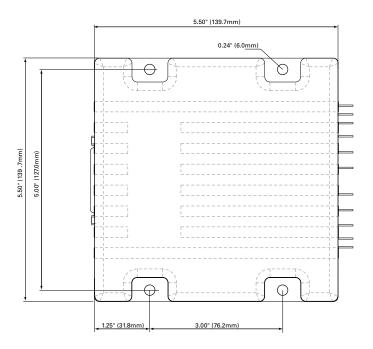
FBLG2360T top view and dimensionsMechanical Specifications
